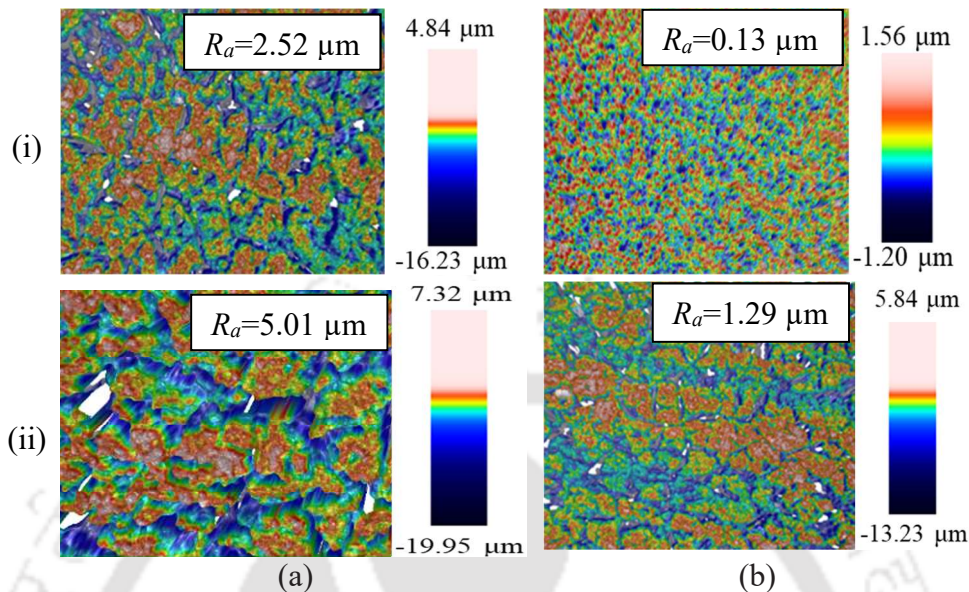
2D surface roughness profiles of fused silica surfaces (i) before and (ii) after wet chemical etching on (a) coarse machined and (b) lapped surfaces
